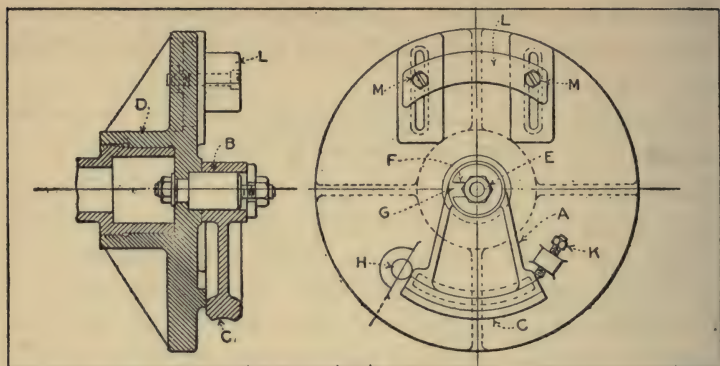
SECTION AND PLAN OF A FIXTURE WITH ADJUSTABLE COUNTERBALANCE
